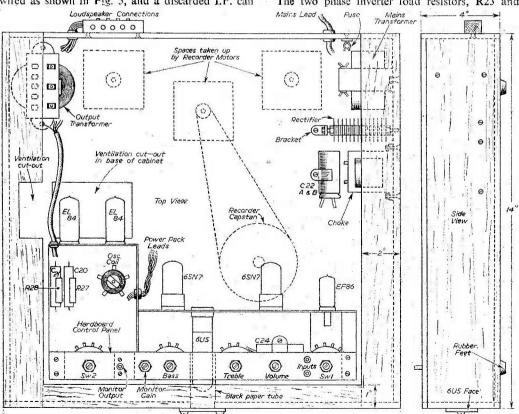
Top and side view of cabinet, showing chassis in position. The "face" panel for the controls is not shown here (see Fig. 8),
